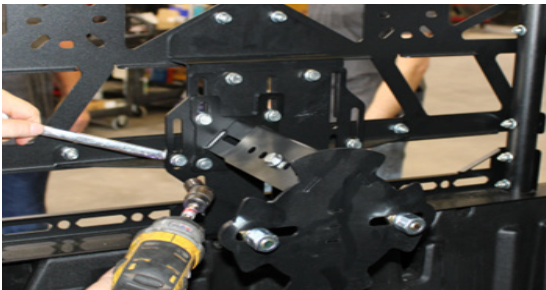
Assemble Spare Tire Mount using 13mm Wrench and 13mm Socket
